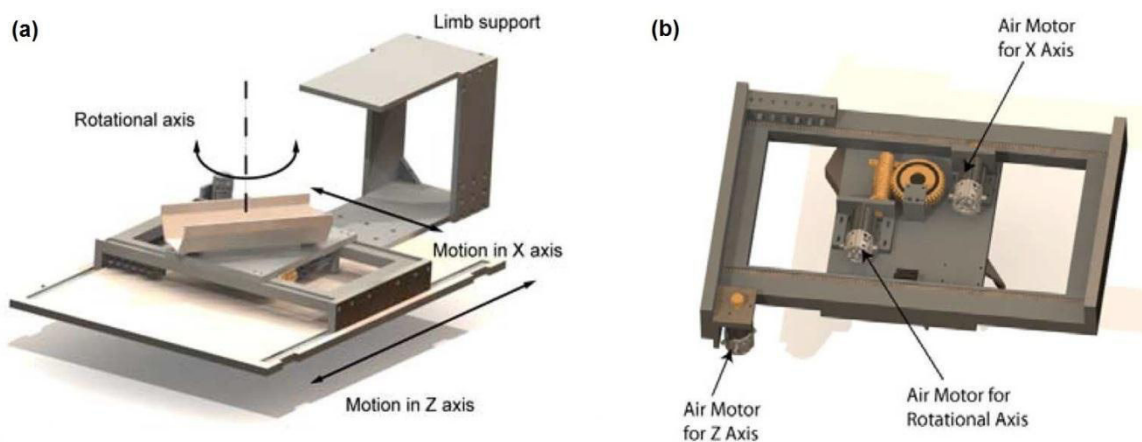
(a) CAD model of system with a limb support. (b) Bottom view of the platform showing the air motors coupled to each axis [23]
